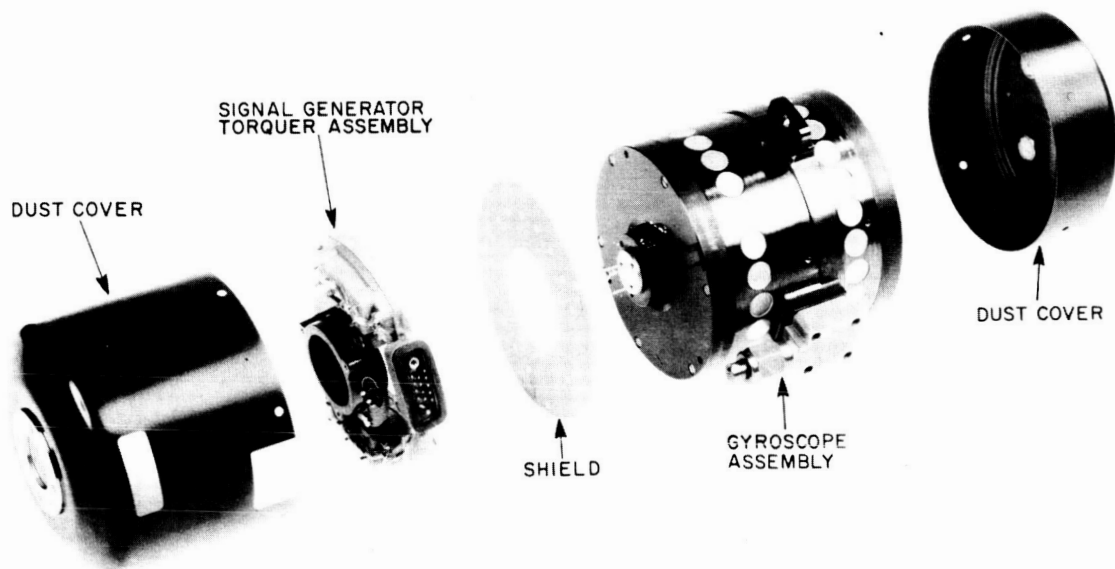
AB5-K8 GYRO ASSEMBLY.
